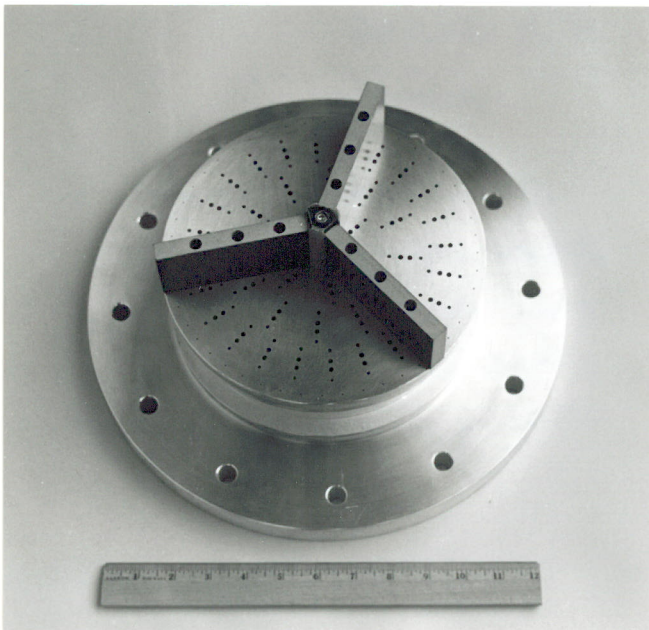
The completed flat face injector with the fuel rings dip brazed in place and silica/phenolic acoustic baffles installed.
